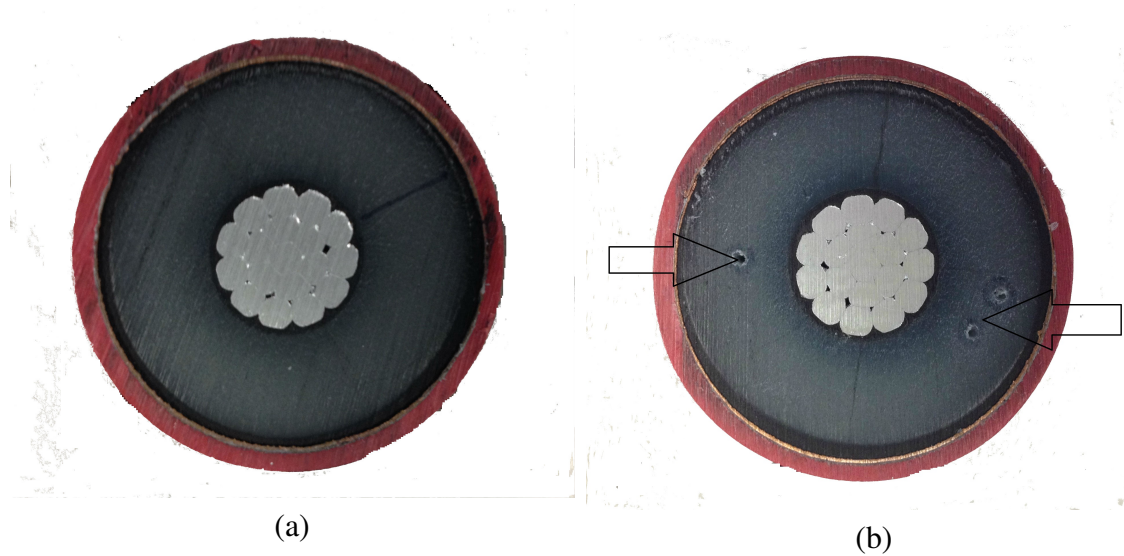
Picture of cables under test. (a) Good cable. (b) Bad cable.
